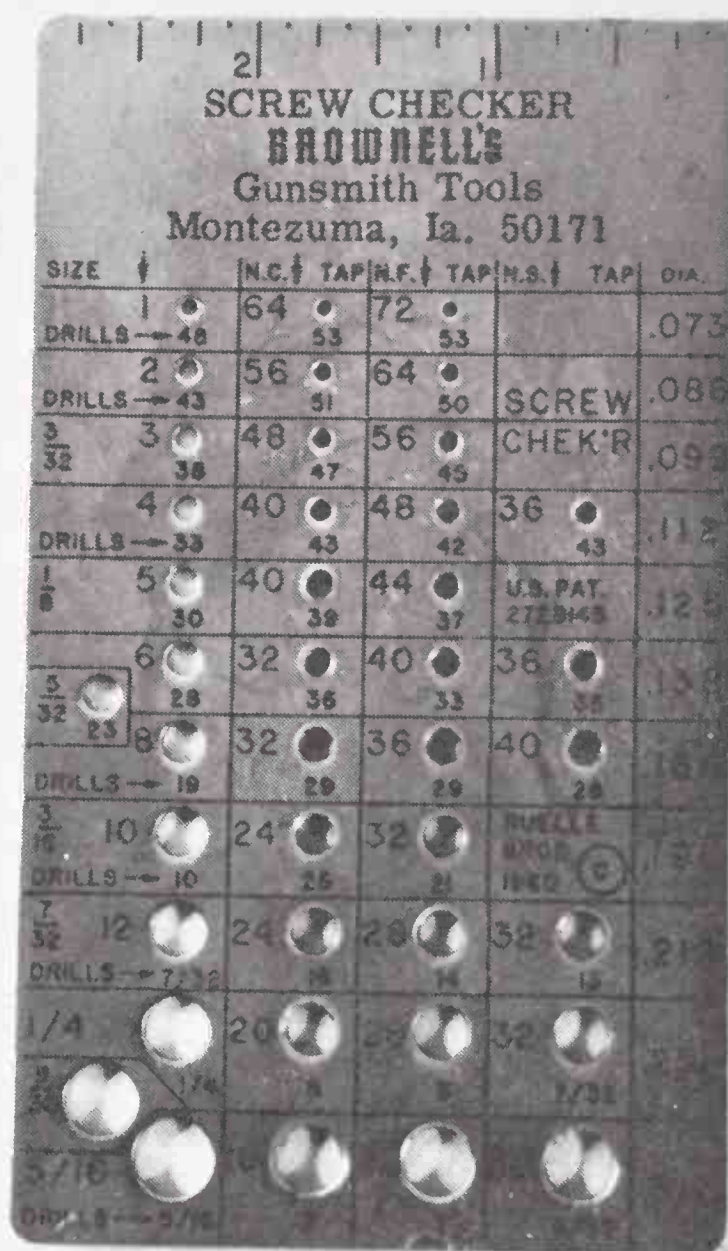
Screw Check'R is a gauge used to indicate screw and drill sizes.
